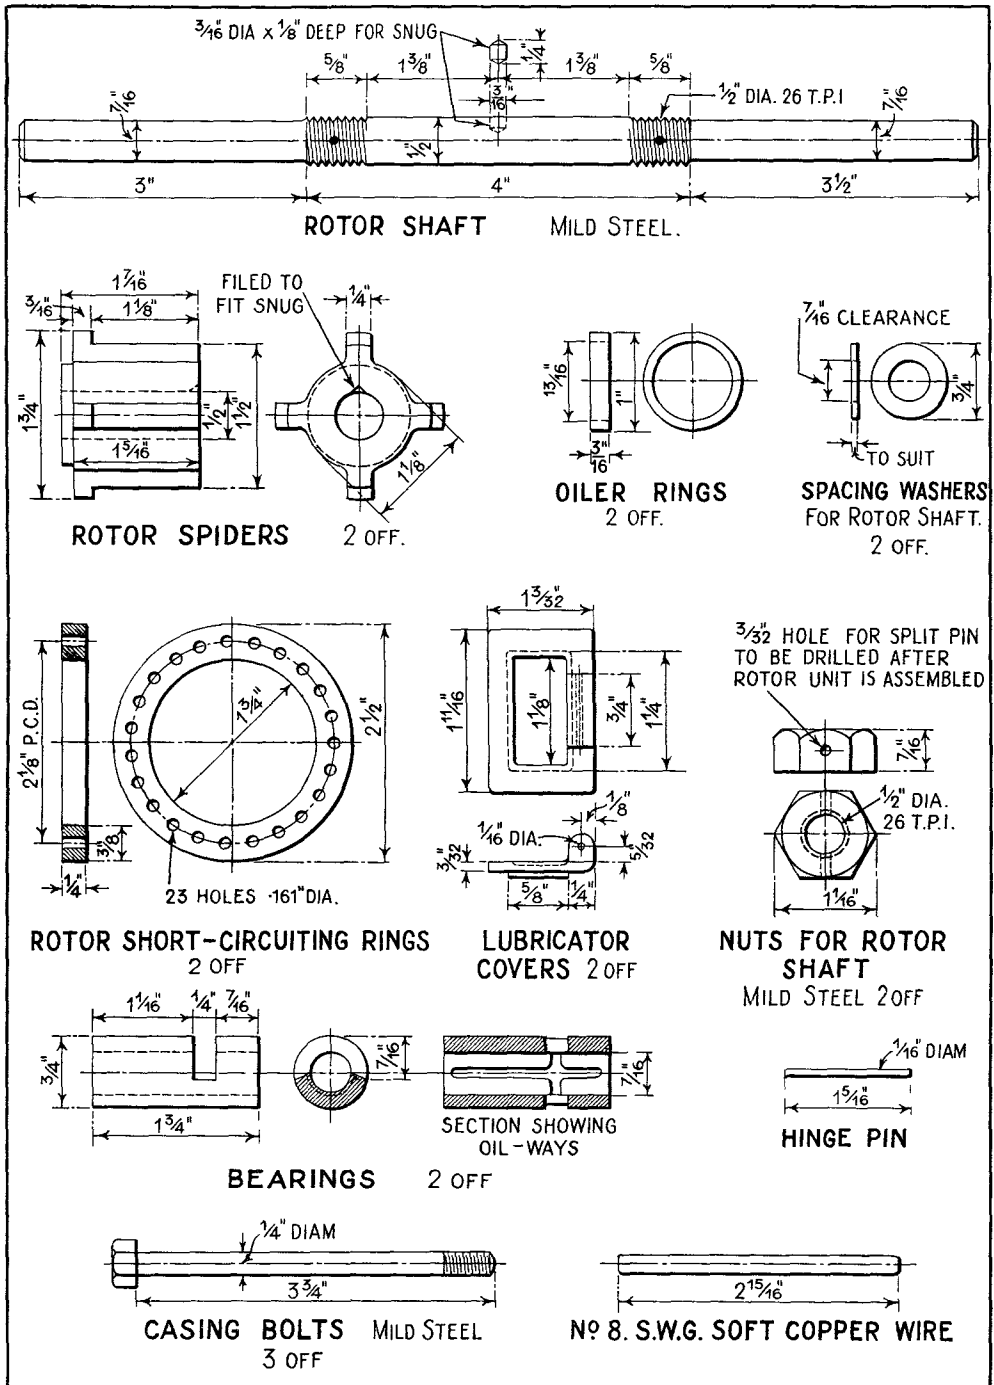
Showing Dimensions and Details of Various Parts of the Motor.
